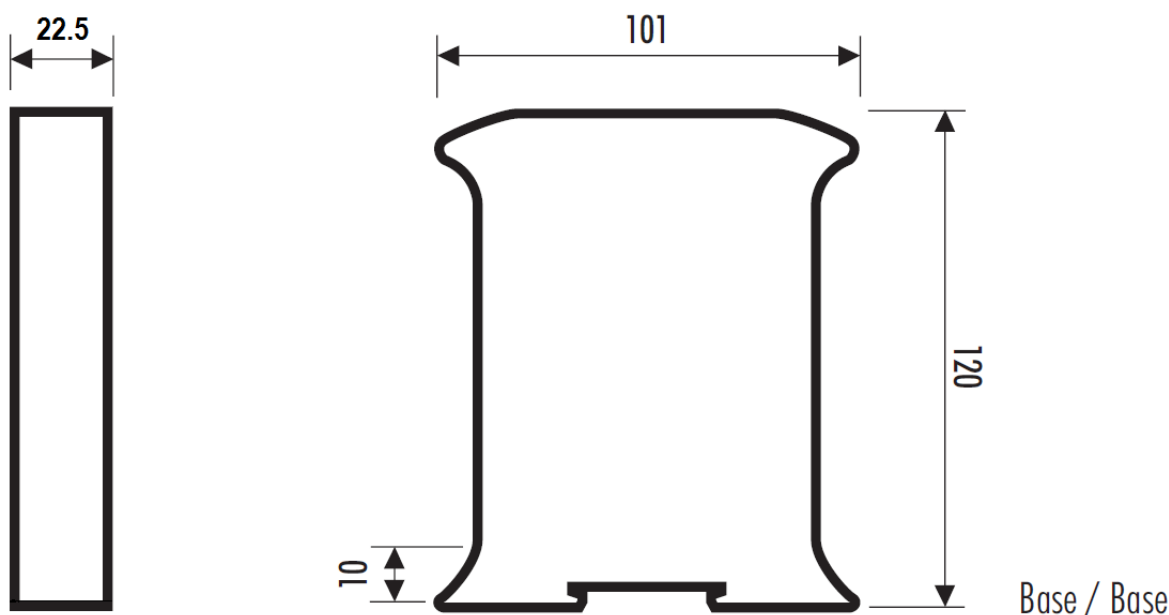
PLX51-DF1-MSG enclosure dimensions
